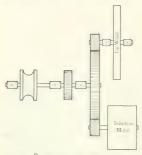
PLAN OF MOTOR AND FLYWHEEL ON WELDING ROLLS Speed of rolls, 89 r.p.m. Flywheel, 375 r.p.m. Diameter of flywheel, 6 ft., weight, 3 000 lbs.
